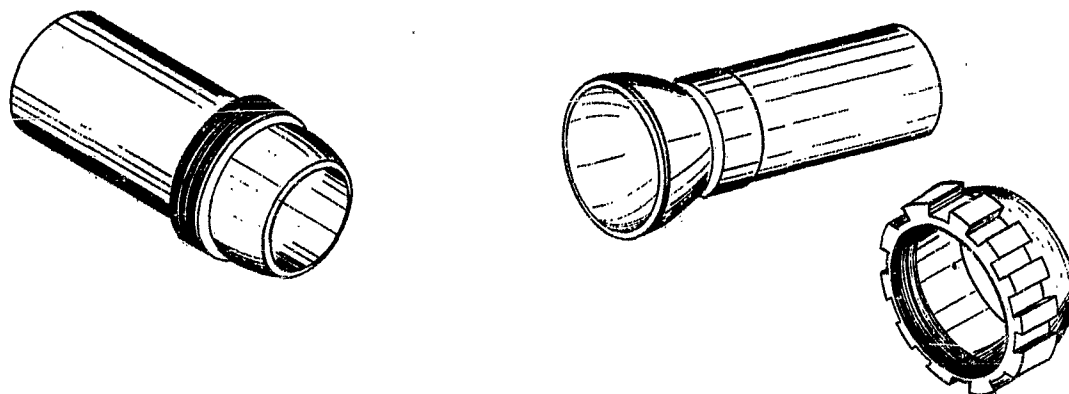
Disassembled Spherical-Type Connector
